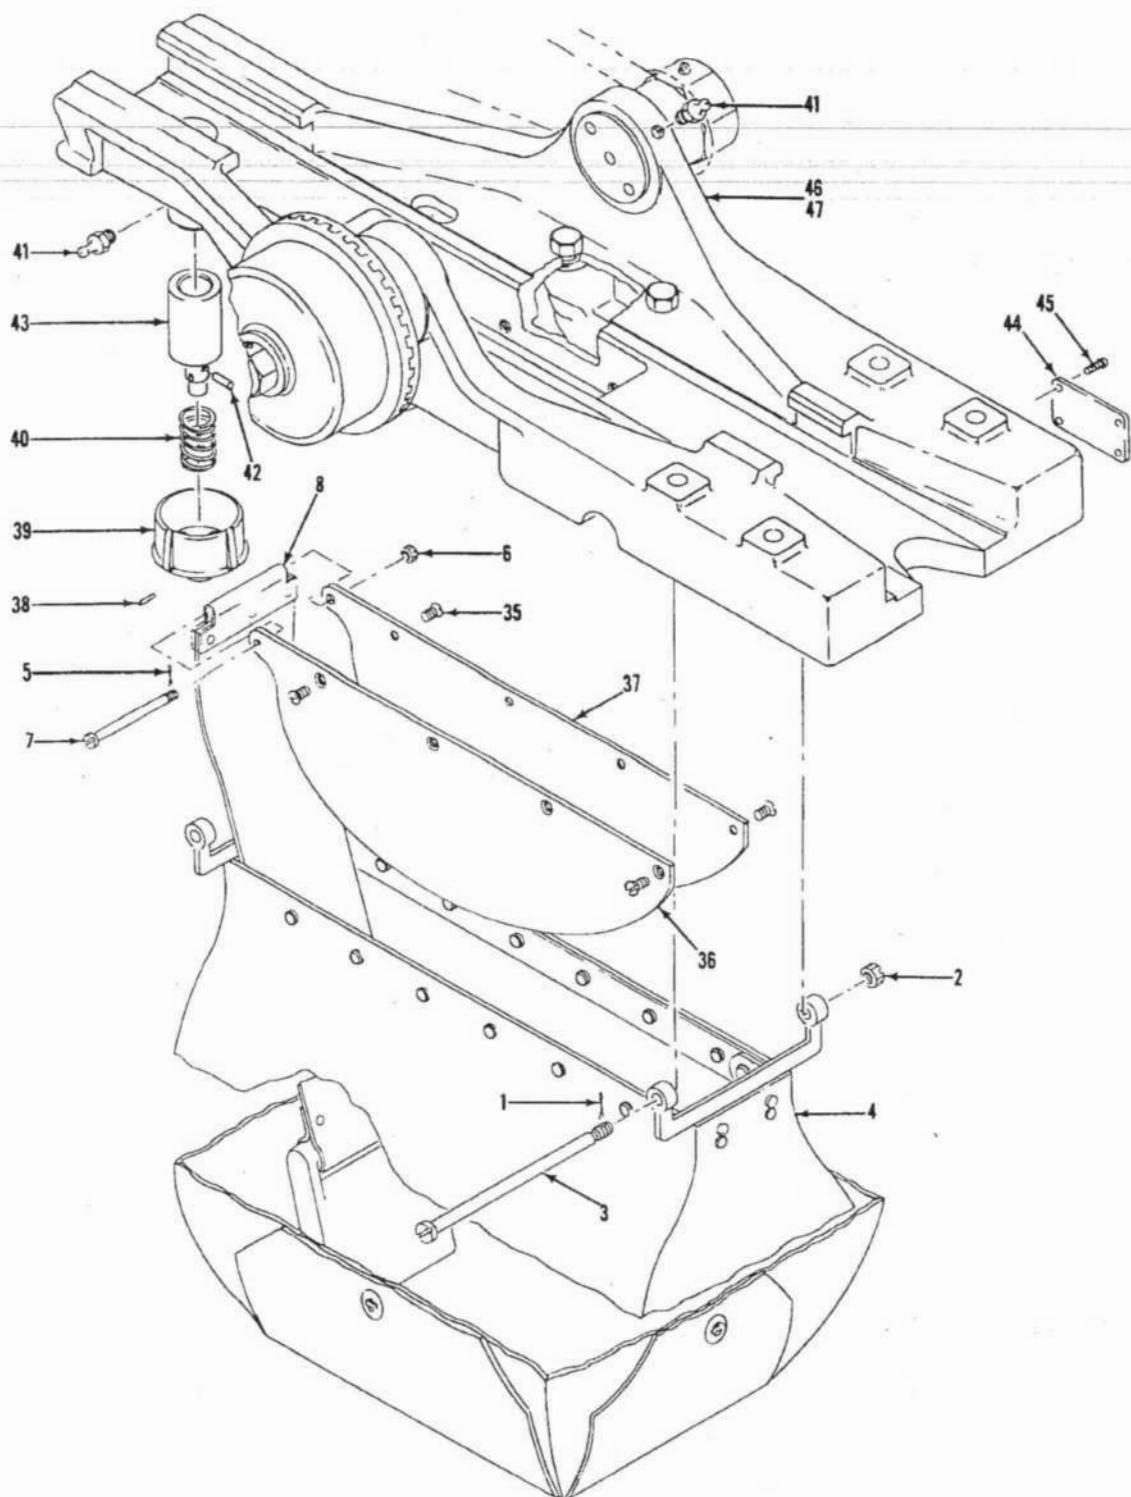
20 MM Cradle (MK 5 MOD 0, 1, 3 and 4) (Sheet 1 of 2)
